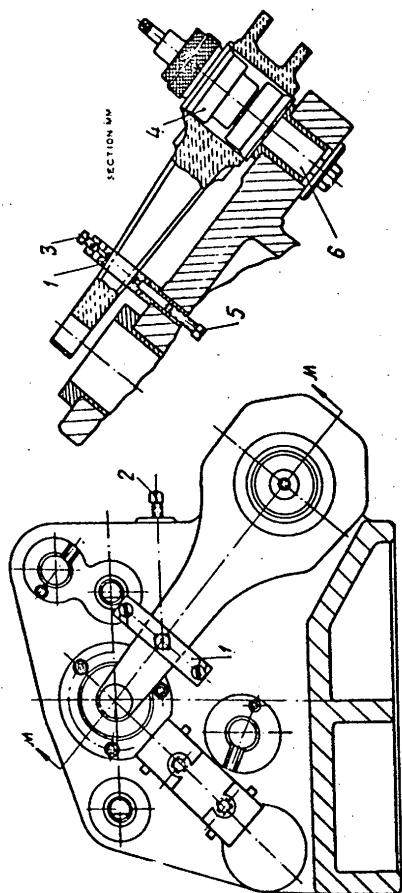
INSTALLATION OF MASTER ROD INTO JIG FOR BORING PISTON END BUSHING
